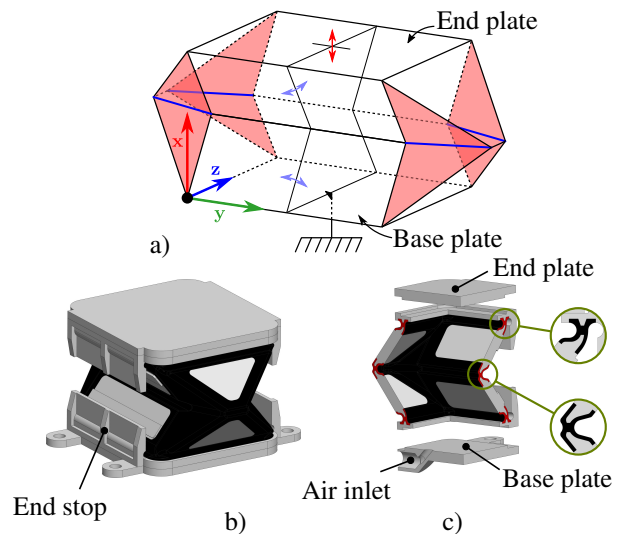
a) Geometry of the polyhedral pocket highlighting both the deformable faces (in red) and the variable length edges (in blue). b) CAD view of the actuator and c) exploded view of a quarter cutout with details on the hinges geometry. The rigid and rubber-like materials appear in gray and black respectively.
